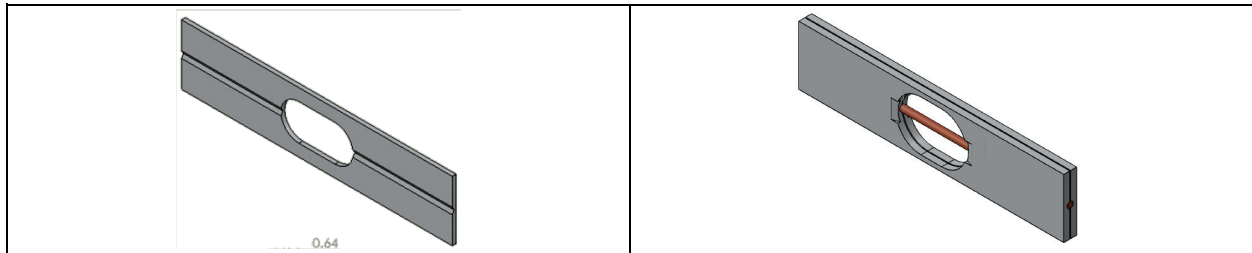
CAD images of wire holder tab designs: (a) holder 001 and (b) holder 002.
